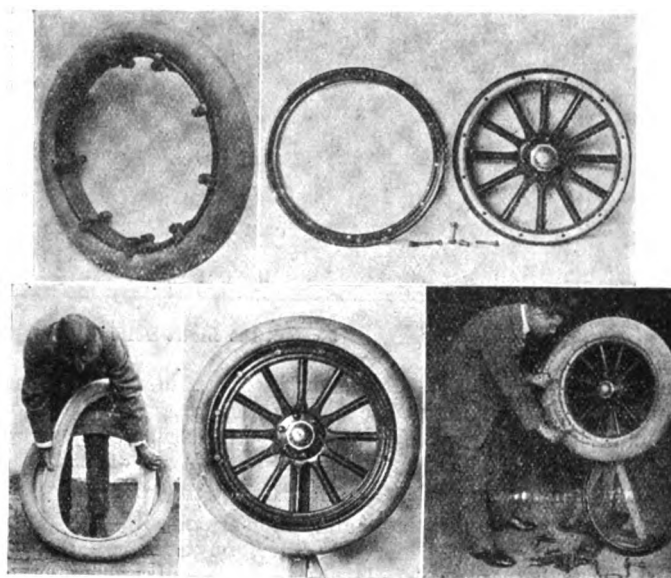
The above group of illustrations show respectively an Elastes-filled tyre mounted on a "storage" rim; a wheel with moveable flange detached; inserting a "boyreau" in an outer cover; the complete wheel and tyre; and the method of easing the last part of the beaded edge over the lip of the rim.
